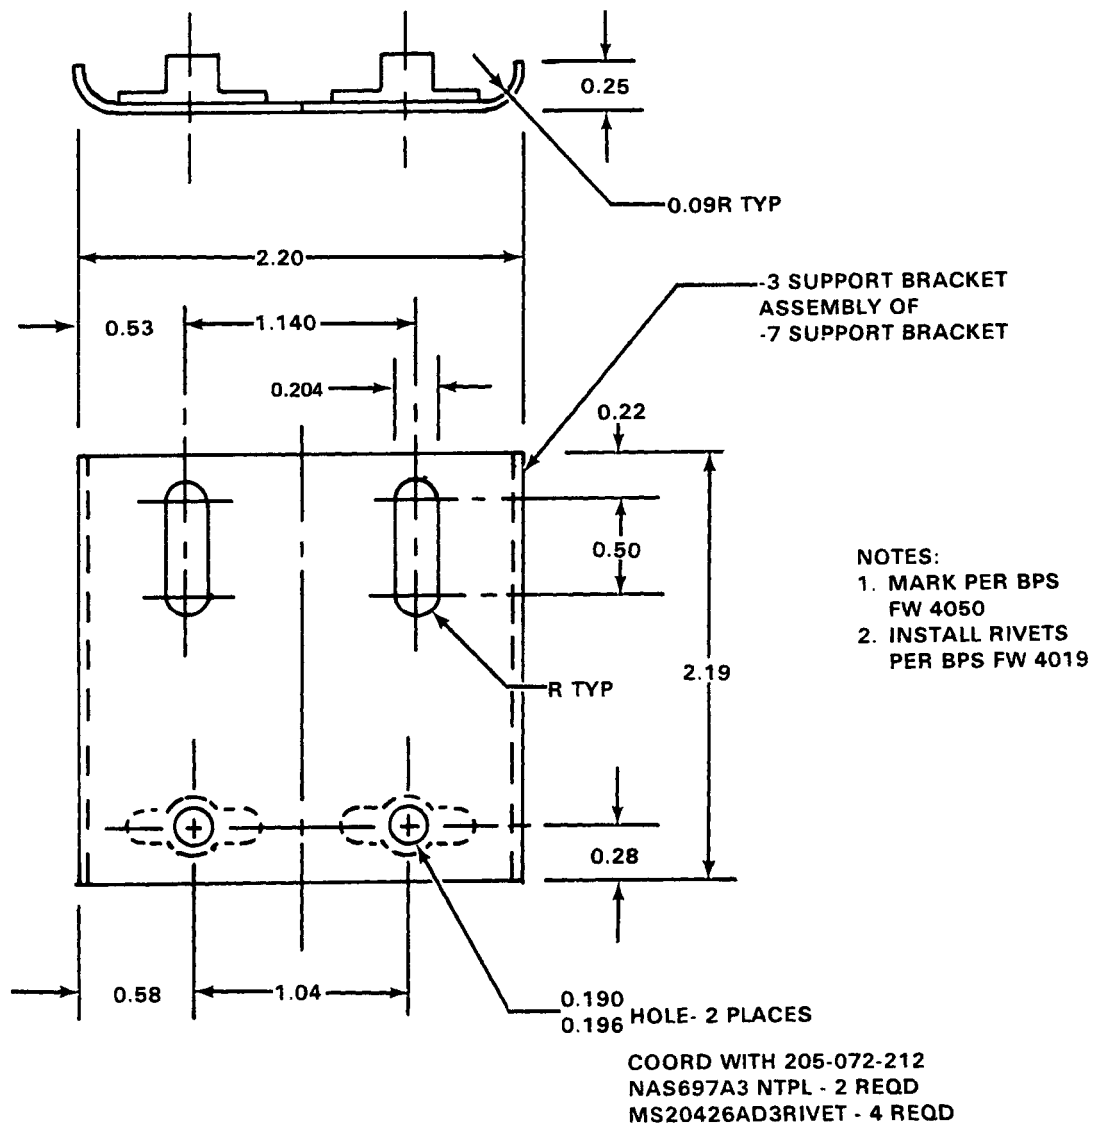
Part Number 205-072-226-1, CLAMP GUIDE
